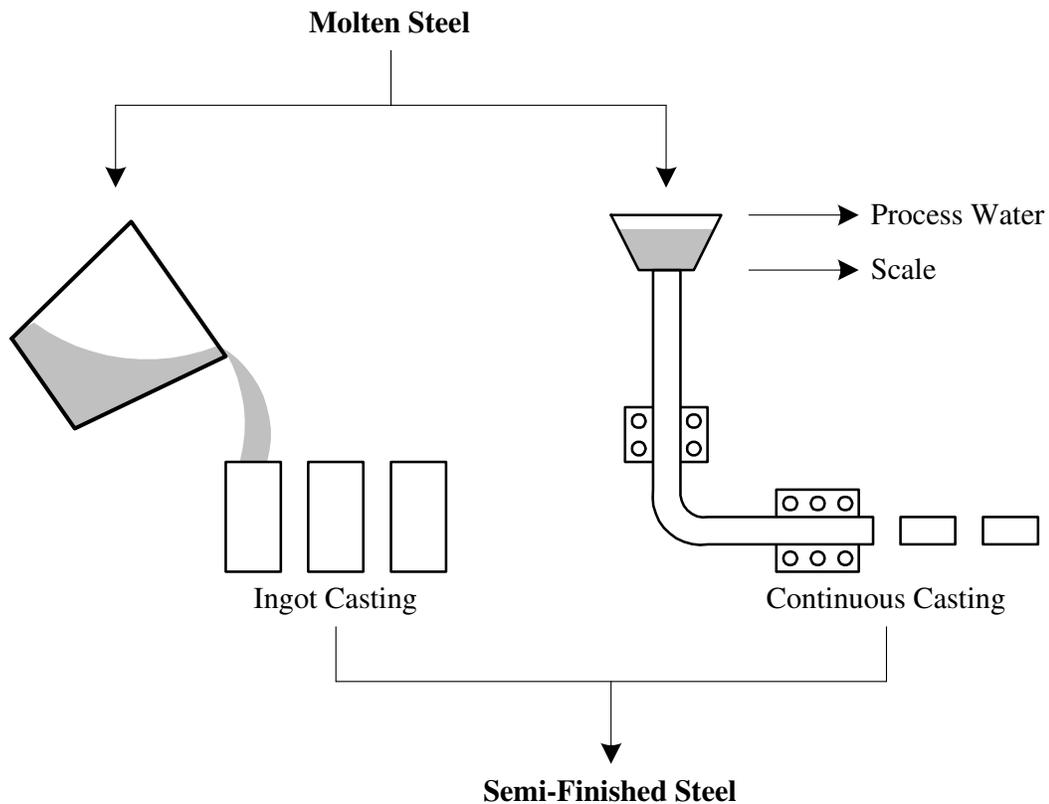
Steel Casting Processes: Ingot Casting and Continuous Casting
